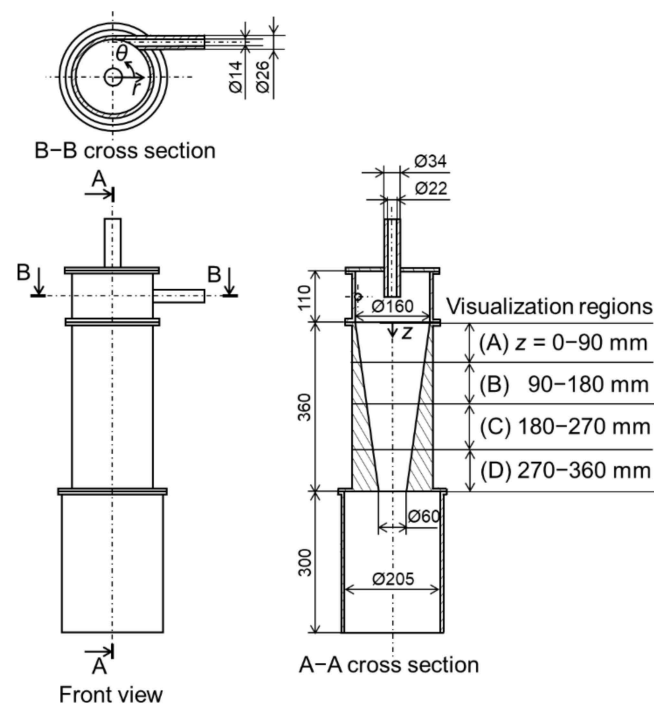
Schematic detailed view of the CO₂ cyclone separator-evaporator.
